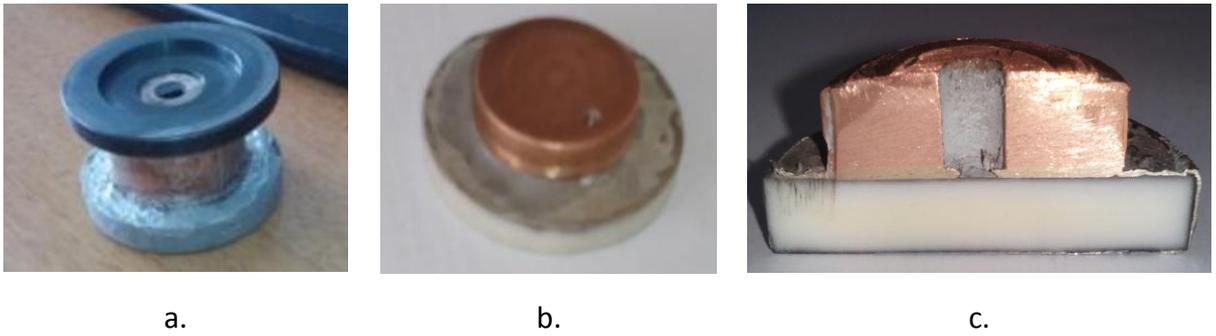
9.: Ceramic-metal brazed joints.
